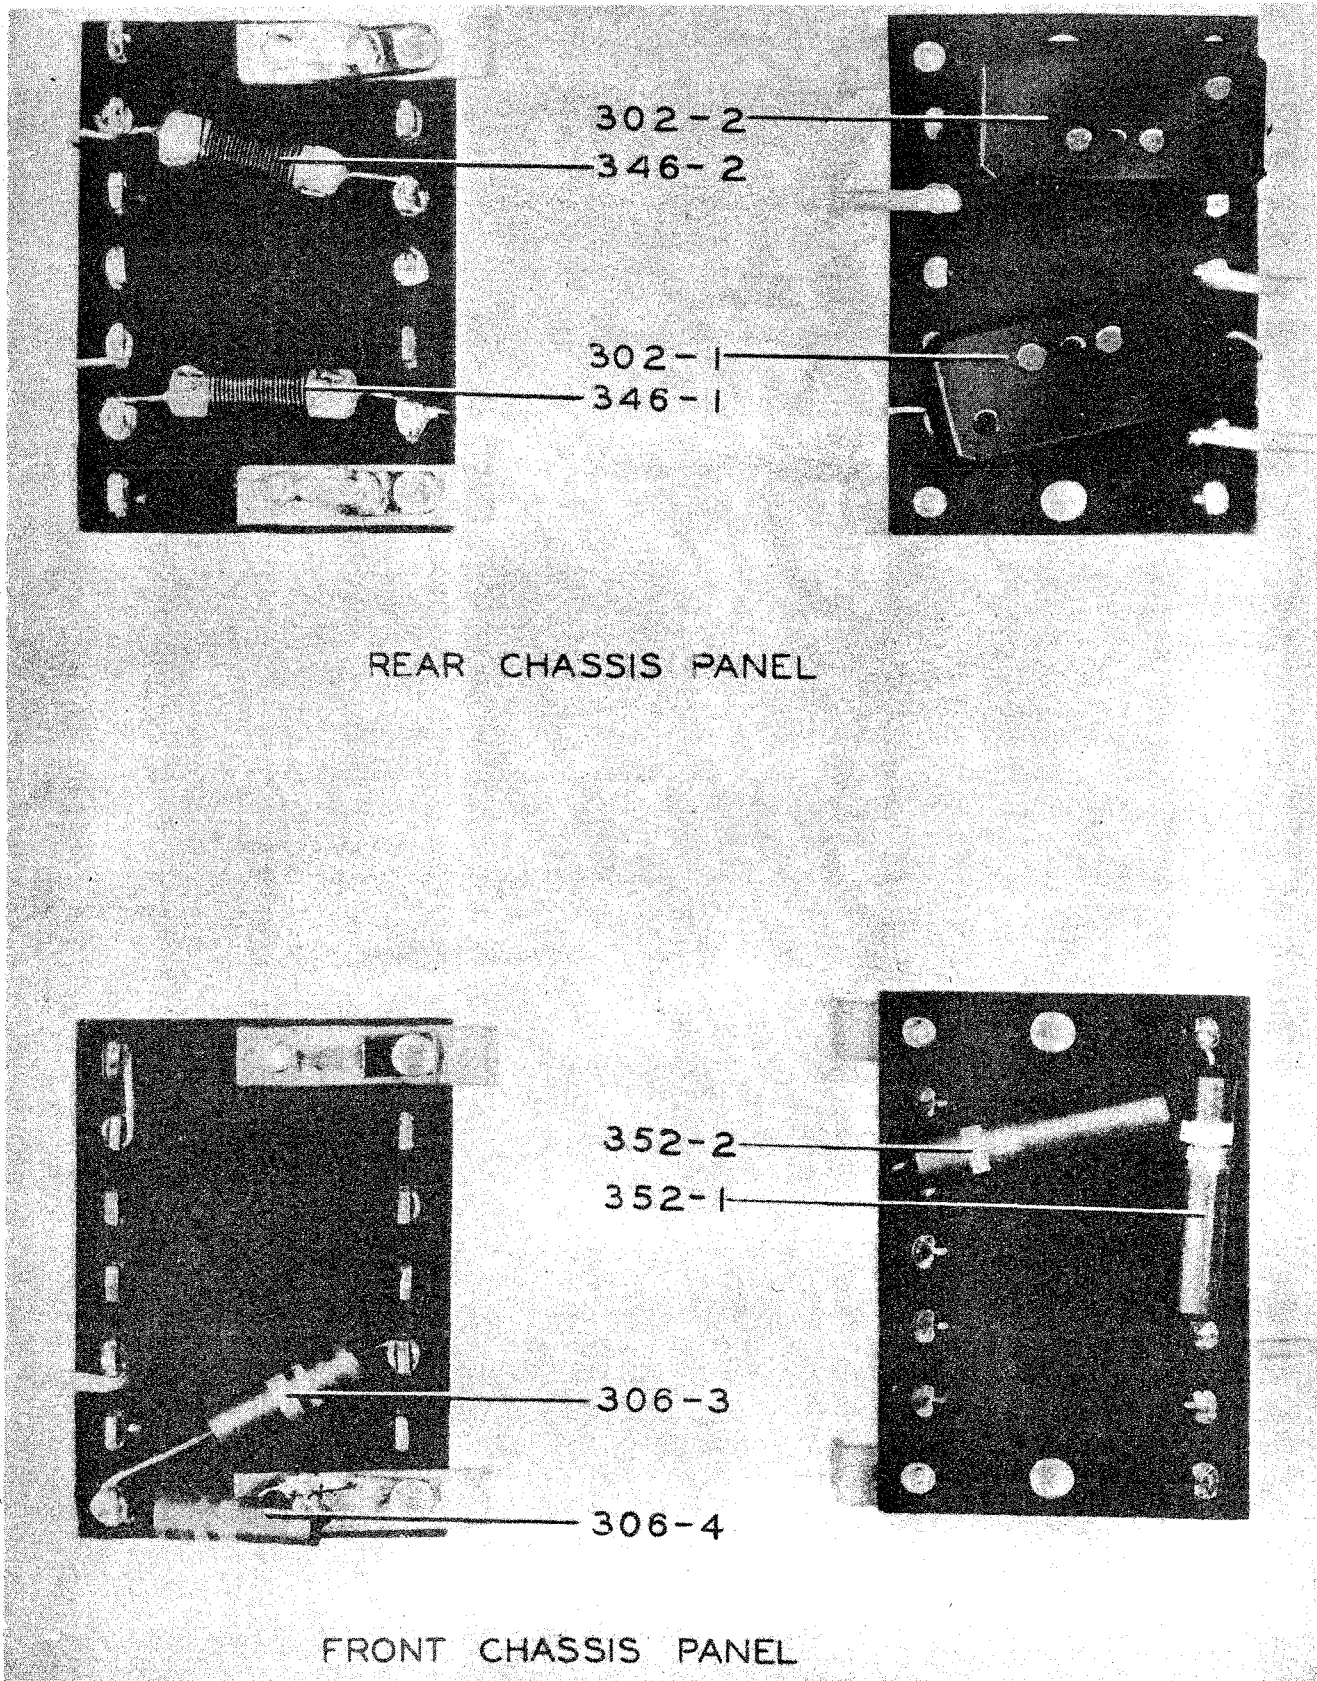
Indicator BC-929-A—Chassis, Components Mounted on Each Side of Short Wiring Panels
